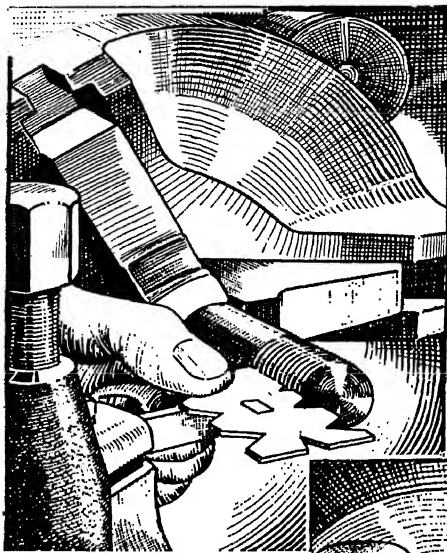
Setting the screw-cutting tool for centre height by means of a centre or screw-cutting gauge.
